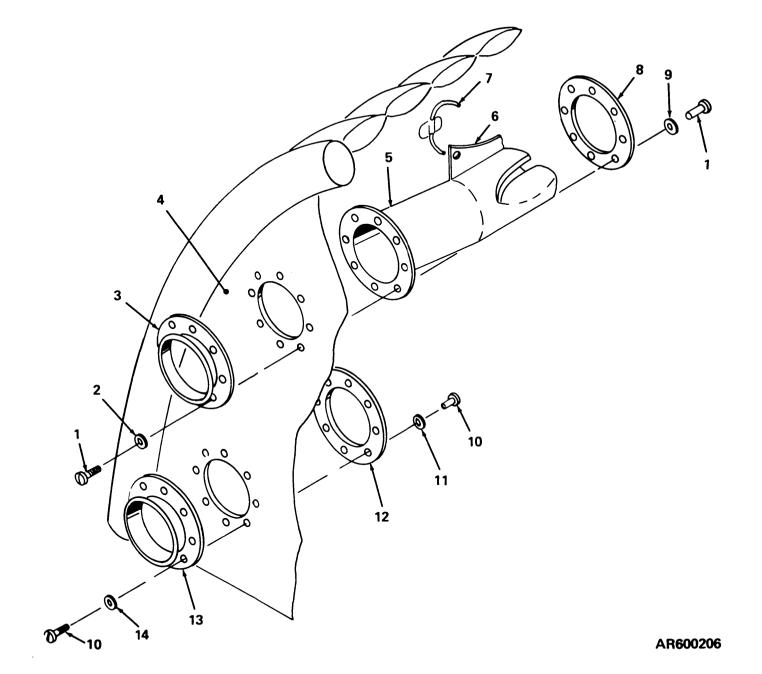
Mounting plates air-conditioning duct, and rings, exploded view.
